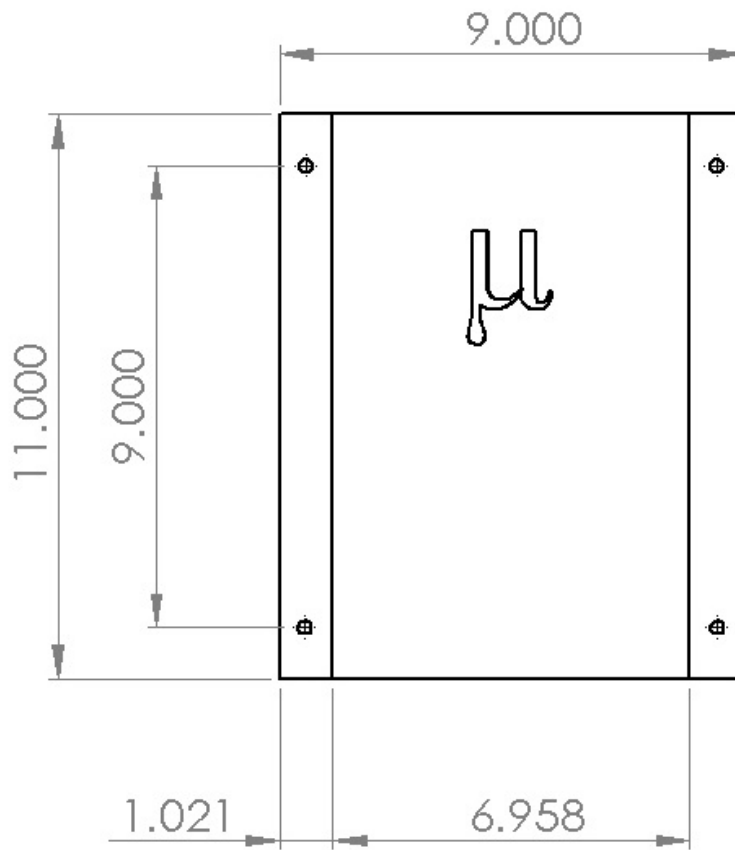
The template for the HIPS safety shield mold, before bending and thermoforming.
